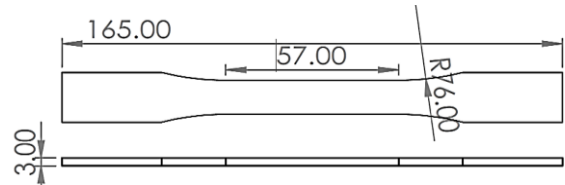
The general shape and dimensions of tensile specimens D638 for 3 samples of socket material [18]
